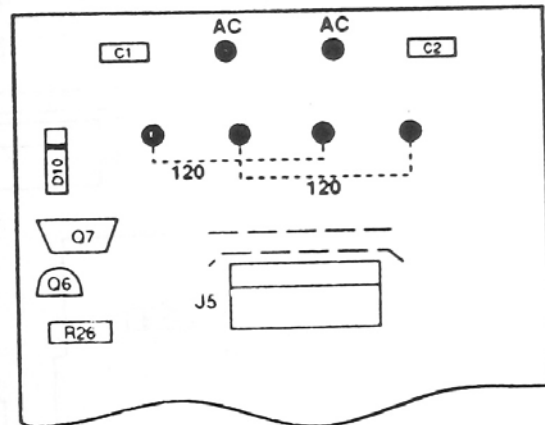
Component Layout, KC500-PS Power Supply Control Board
